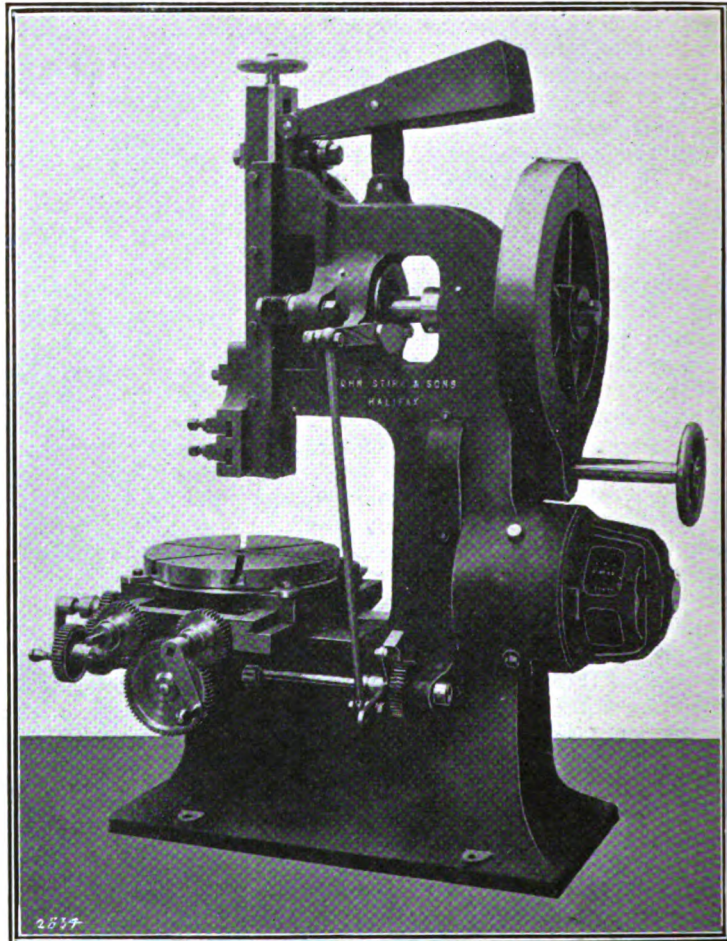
THE STIRK ELECTRIC SLOTTING MACHINE.
